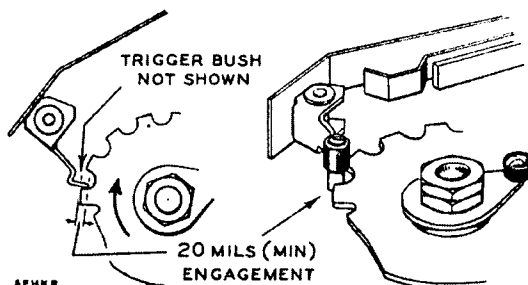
CHECKING DEPTH OF ENGAGEMENT OF TRIGGER
